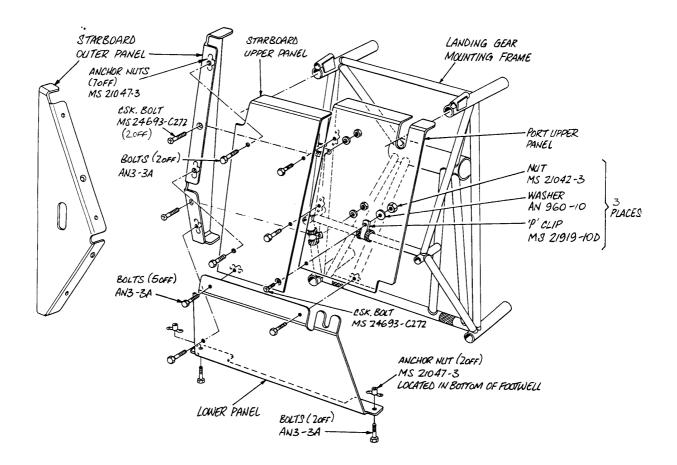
Exploded view of firewall assembly (monowheel frame shown - trigear is similar).
